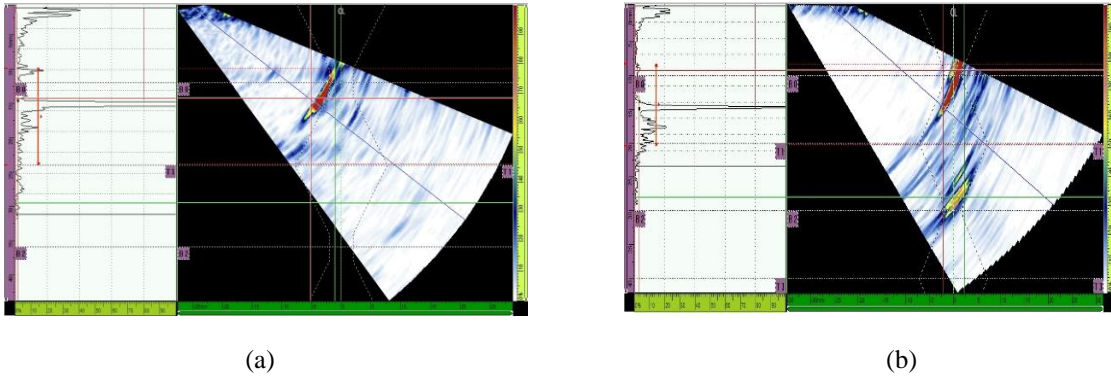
Sectorial scan of weld in sample 5 (a) at the starting of weld and (b) at the end of weld
